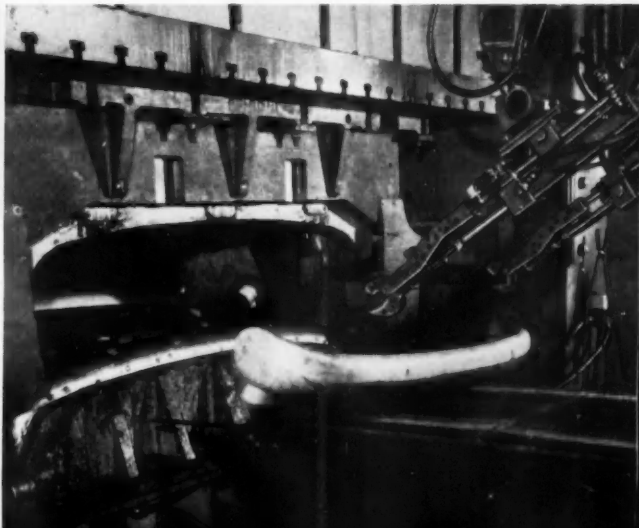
Suction cups on the carriage here shown have just picked up a blank from a stack and have released it onto the loader that will advance the blank into the 2500-ton draw press after its die is opened and the prior piece is removed.
